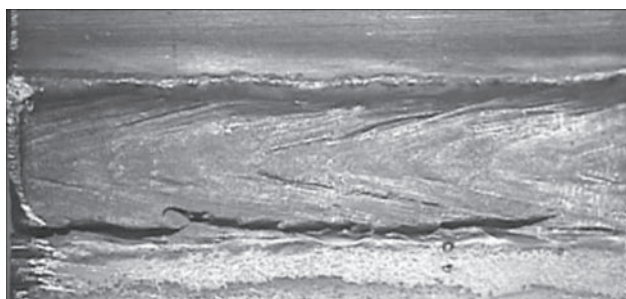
Typical geometry of a longitudinal crack on the surface of a butt joint of SS2333 stainless steel ($\delta = 10$ mm), produced by laser-arc welding with Avesta 253MA electrode wire (1.2 mm in diameter) [9]
